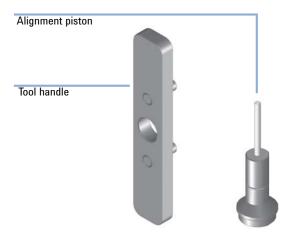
Replacement kit for 1290 Infinity pump head alignment tool (piston/handle)
